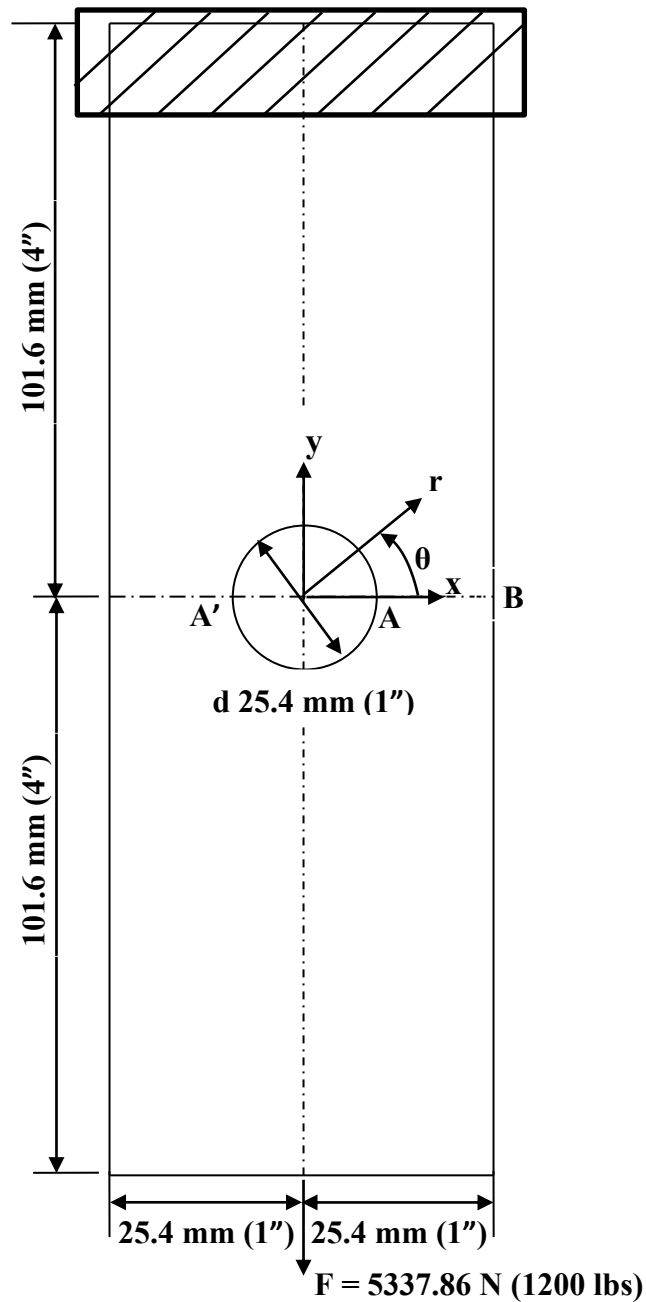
DIC Plate Geometry and Loading – Unclamped specimen length = 93.98 mm (3.7")
